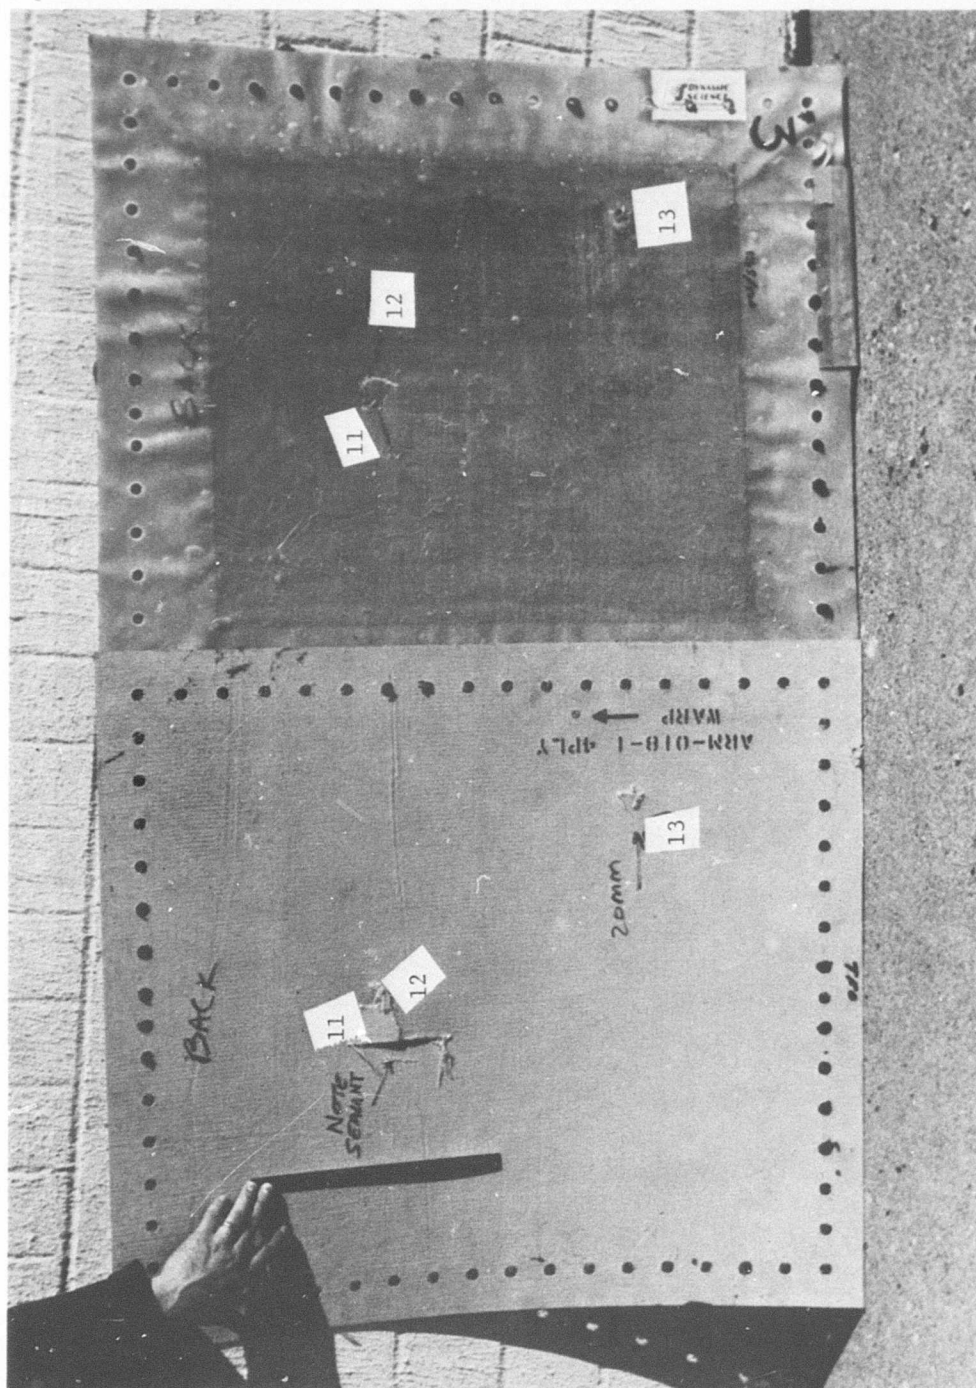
Exit Test and Backing Board Panels, Shots 11 - 13
